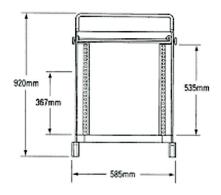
Keysight 1181BZ testmobile cart dimensions.
